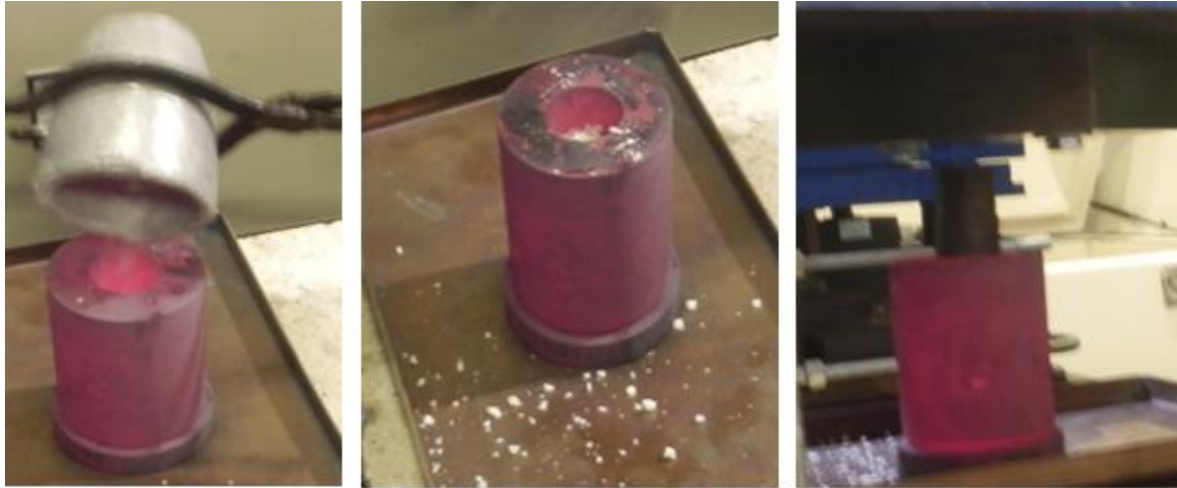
Filling a foundry mould (mould pressing) with melt (left); a foundry mould with melt and salt poured into the mould cavity and a view of the mould and the working parts of the hydraulic press (right)
